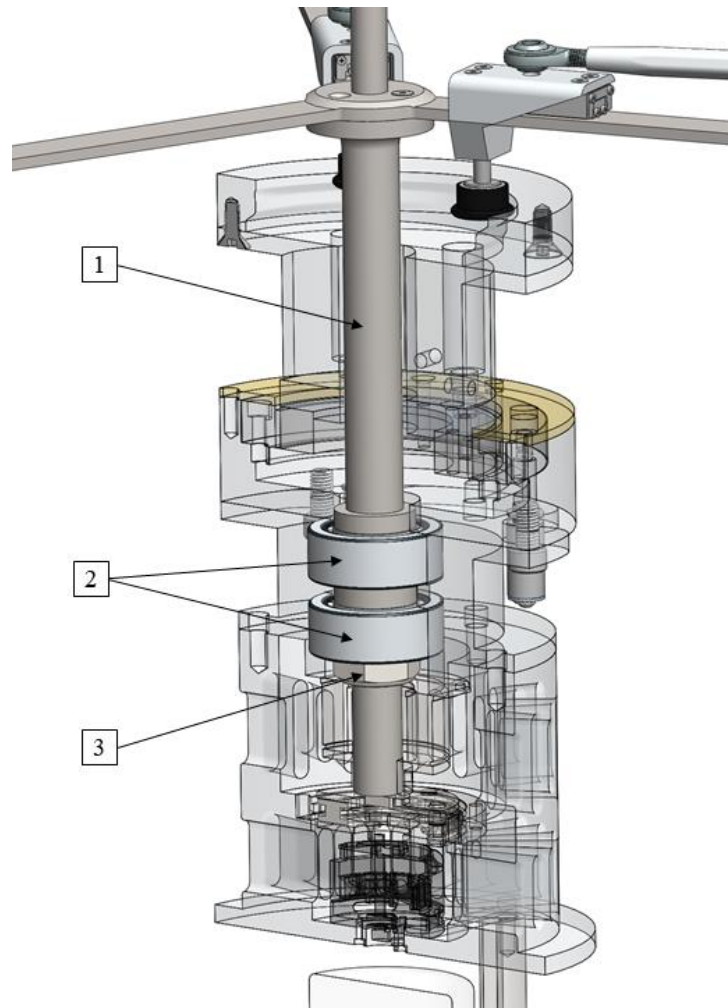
Main shaft assembly. Rotor arms are attached to the exposed main shaft. Lower Main Shaft (1) Main Shaft Bearings (2) Shaft Lock Nut (3)
